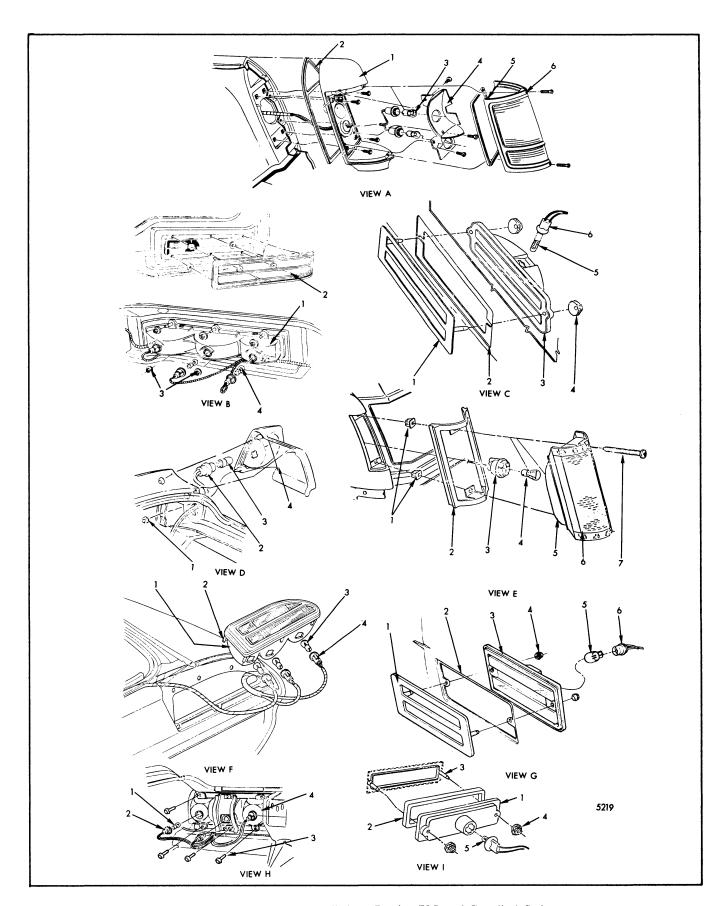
Exterior Lamp Installation - Pontiac (U.S. and Canadian) Styles
